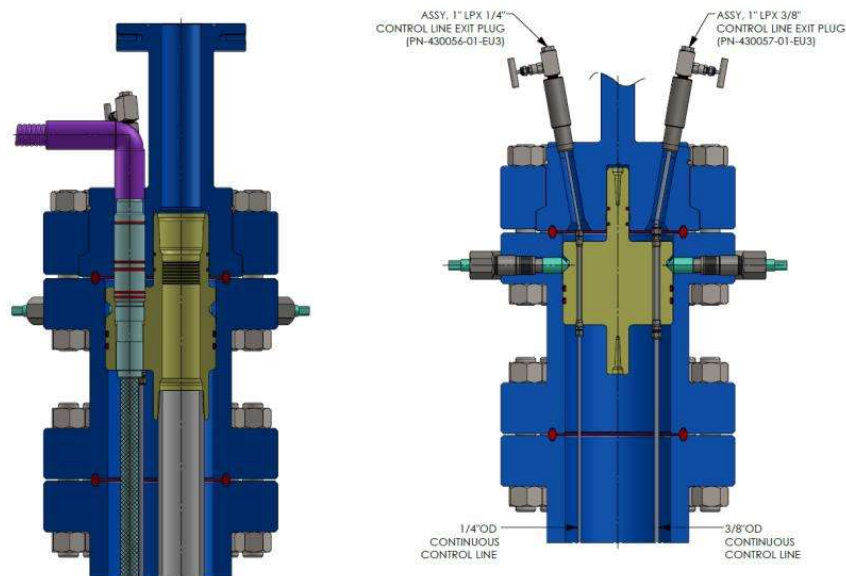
Wellhead Adapter Assembly & Wellhead Penetrator for ESP's well.
